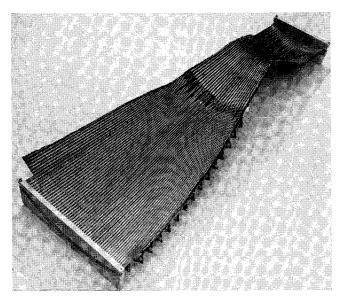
Rocket engine section showing brazed tube construction and heat marking.
